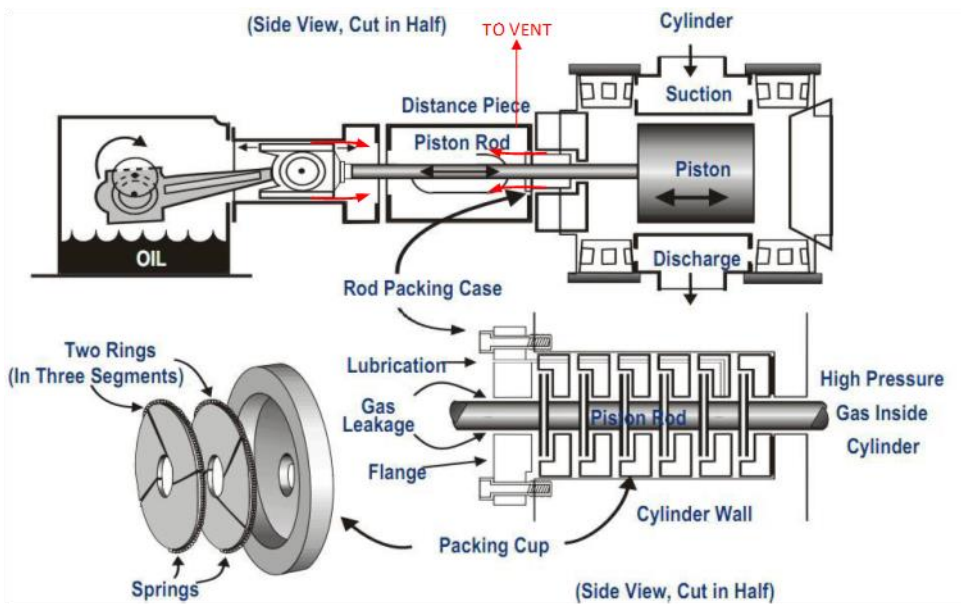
Reciprocating Compressor Distance Piece Schematic
